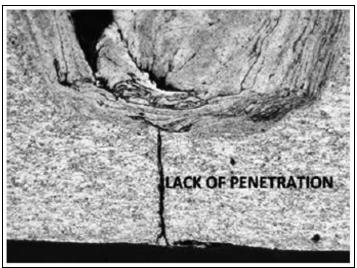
Showing image of lack of penetration defect obtained at the bottom of butt weld joint below the stir zone, which was presented by Lacki et al. study [85].
